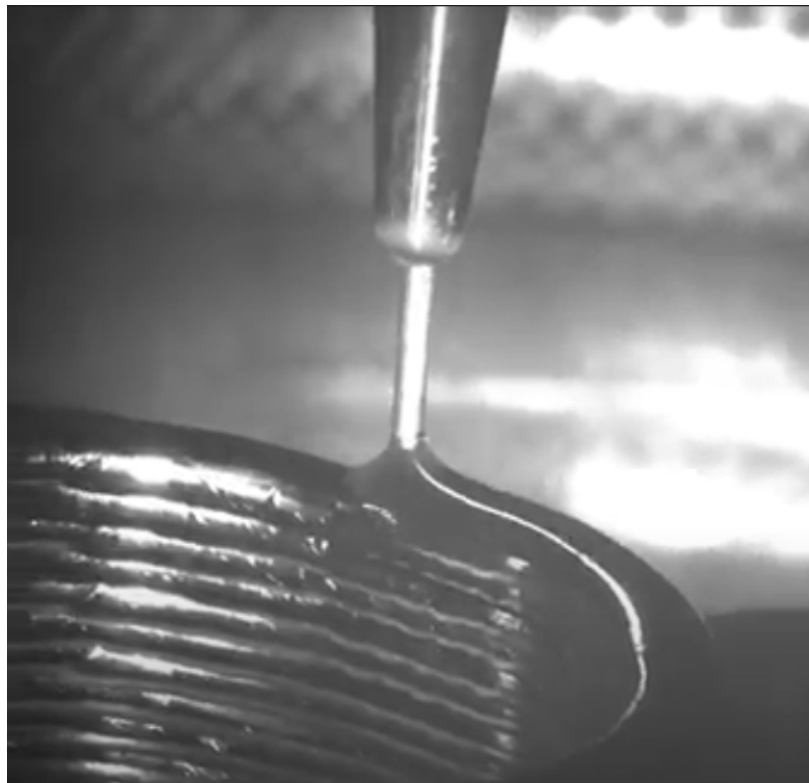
DED Laser hot wire process as seen by a Cavitar Welding Camera
